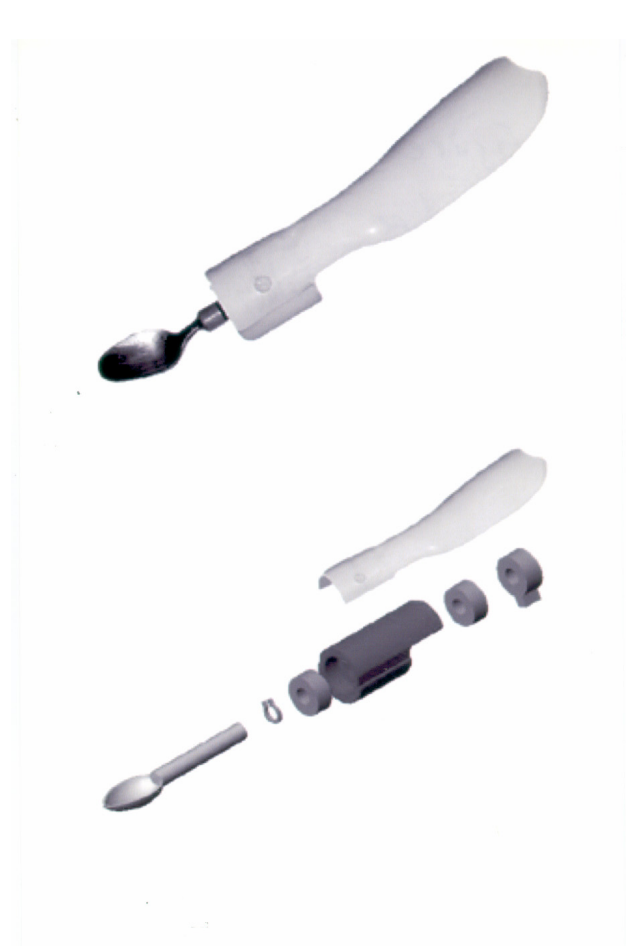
Final Prototype and Exploded CAD Assembly.
